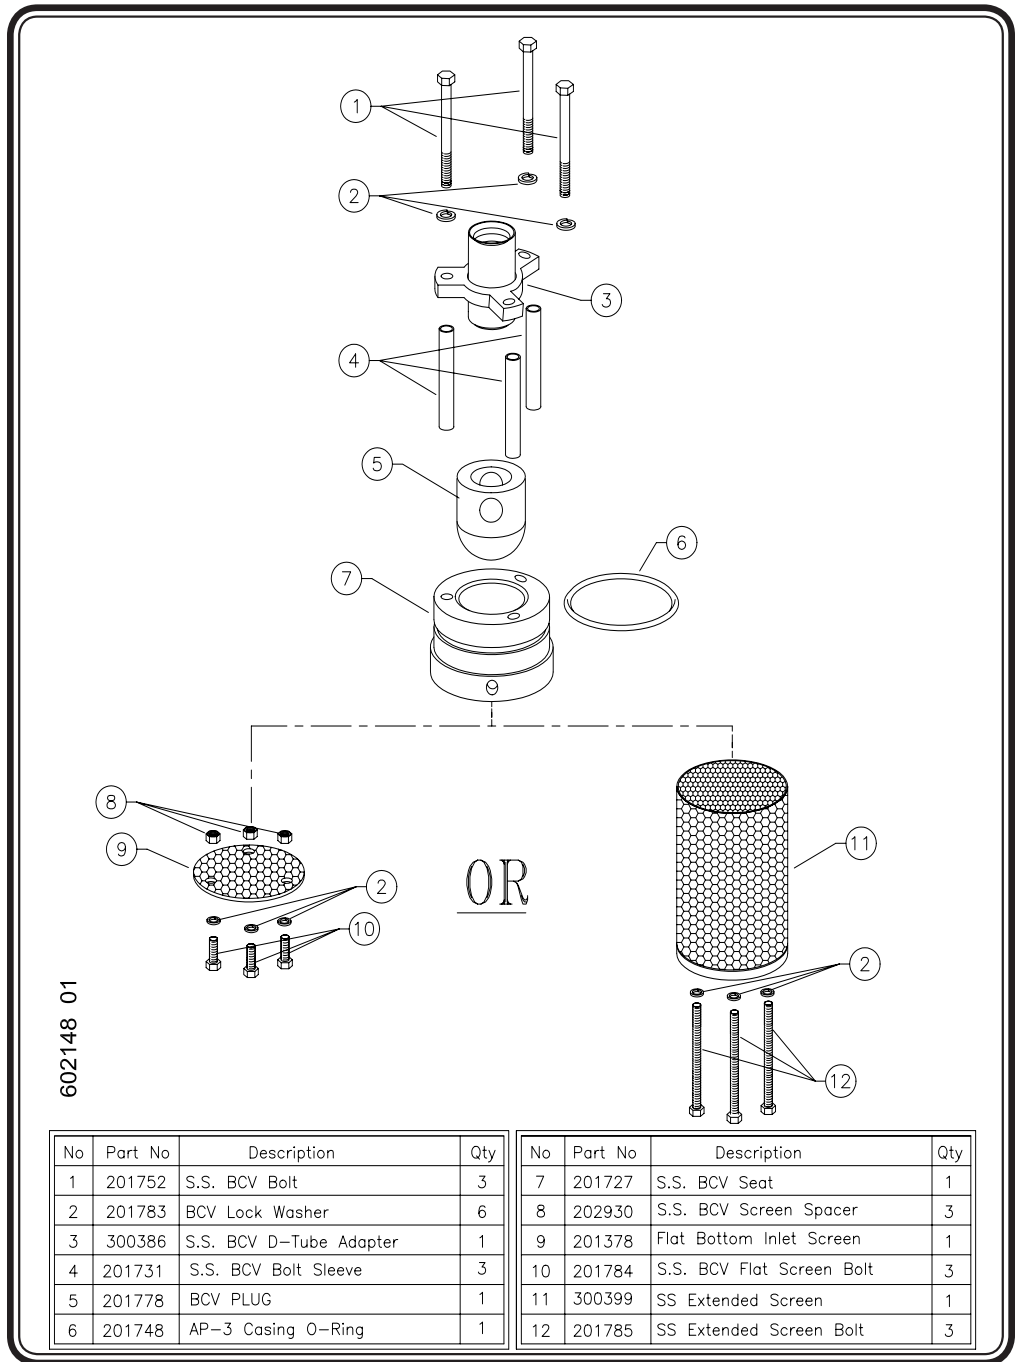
Exploded View of Bottom Intake Check Valve Assembly with Standard Flat Screen and Leachate Screen
